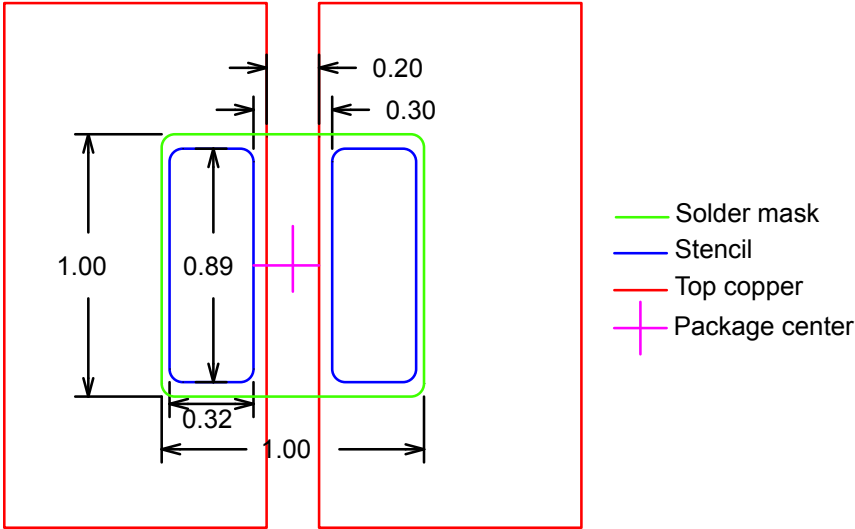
Recommended PCB solder pad layout for L0F2-Bxxx1000xxx1.
